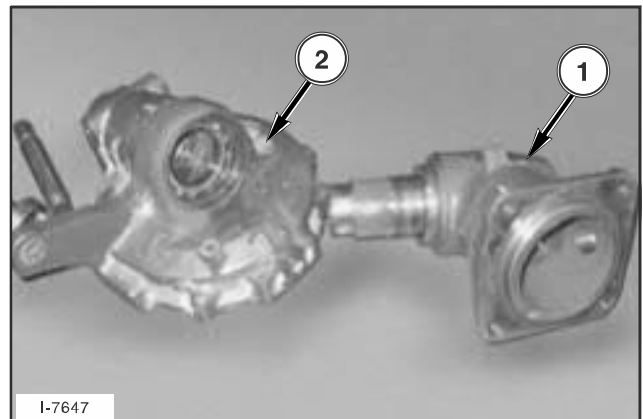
A-40: Remove bevel gear (17T) and bearing.
